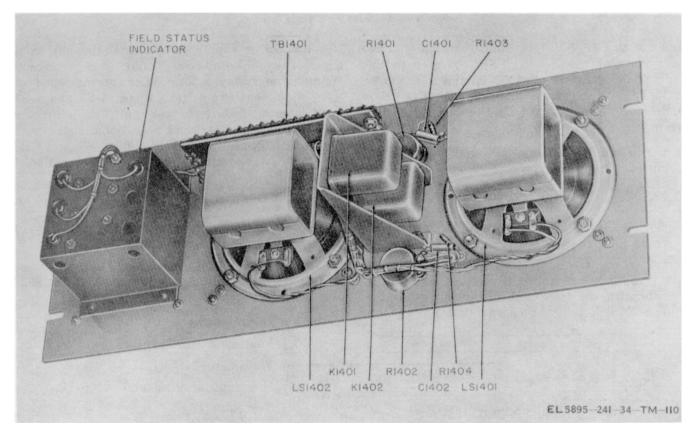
Console, Communication Control OA-2055/FSW-8, loudspeaker and indicator panel, rear view, parts location.
